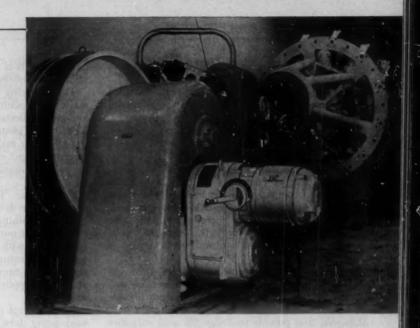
A range with four drive units is supplied by a remote adjustable-frequency power unit. Three motor-belt-adjustable sheave units provide speed-trimming. The fourth drive is a double-reduction gear motor.
